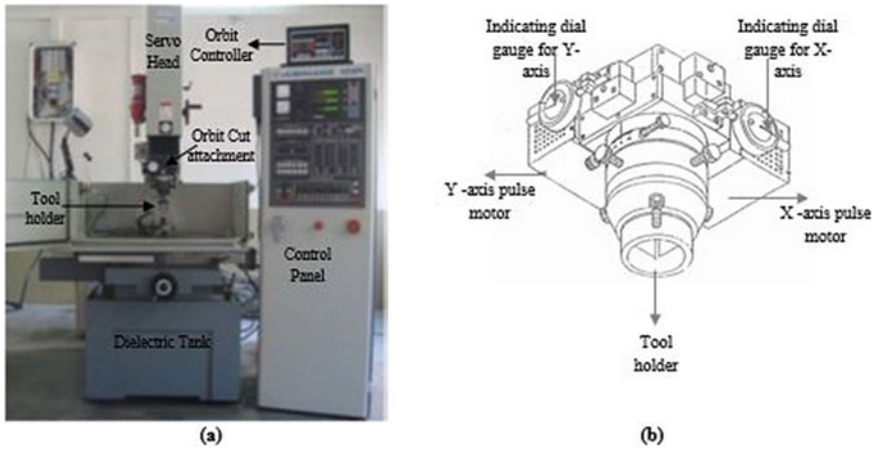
Experimental set-up. a Electrical discharge machine. b Orbit cut attachment
